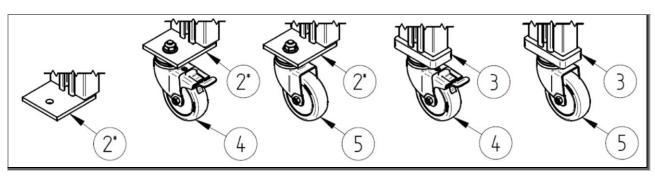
Parts list: Conveyor support, components ZZ.982.0106.00
